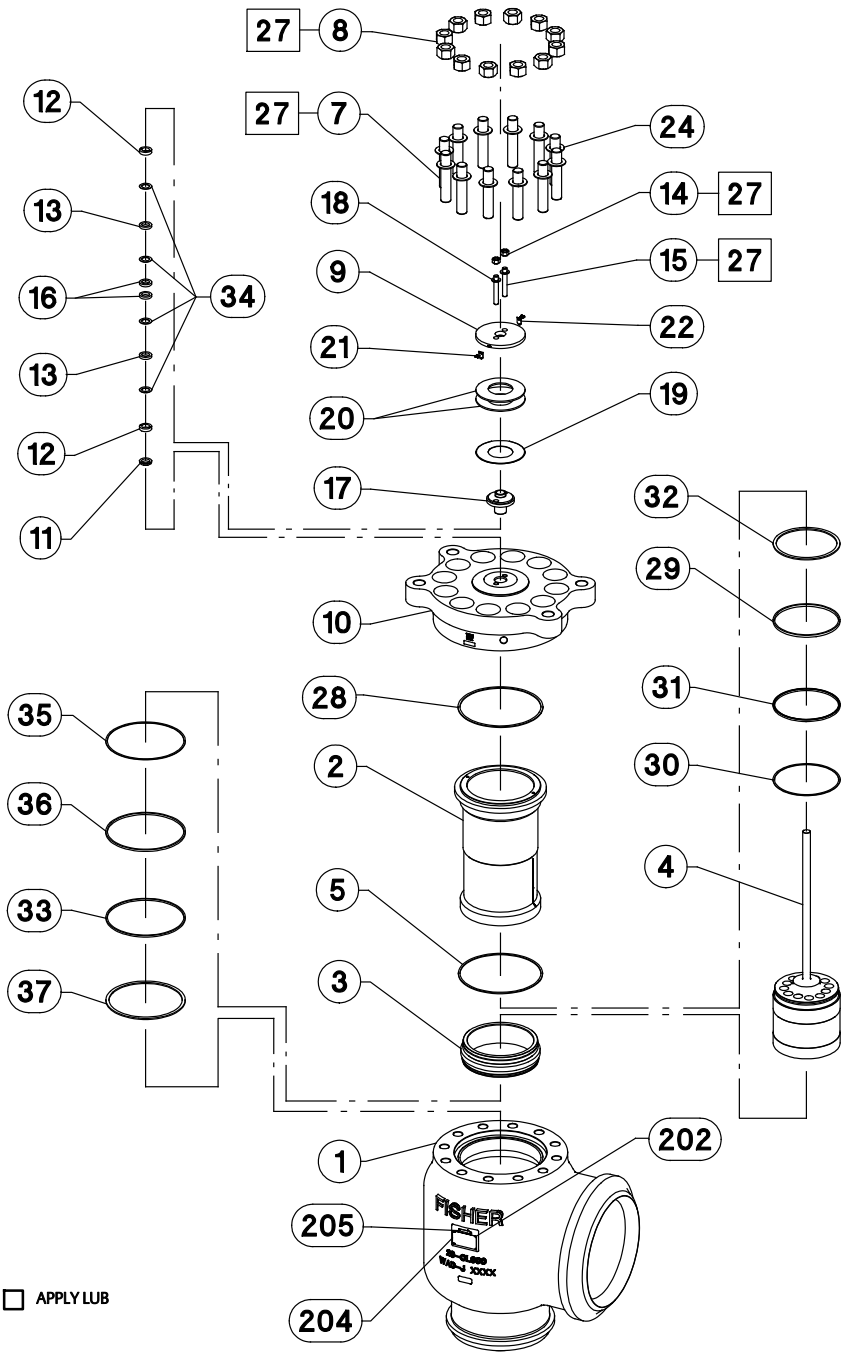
NPS 16x20 EHAT Valve - Exploded View
